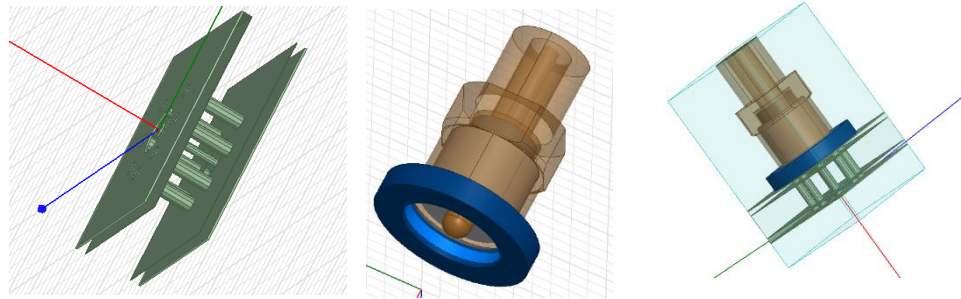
PCB, Samtec connector and PCB assembled with Samtec connector
